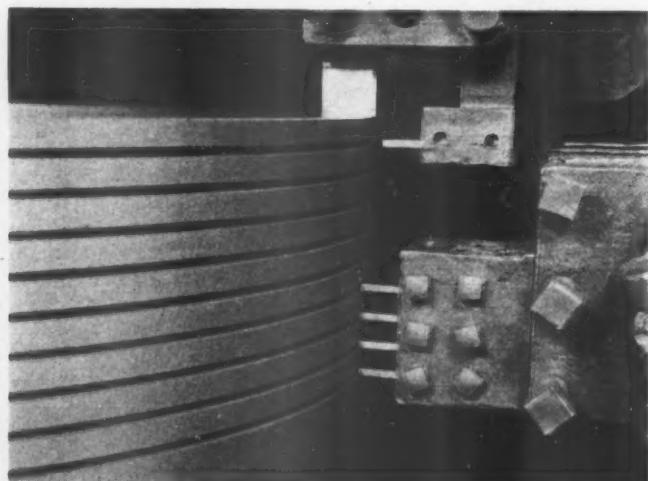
The gang tool cutting grooves in the tub—The parting tool is shown at the top ready to be used, while the facing tool is seen in action
